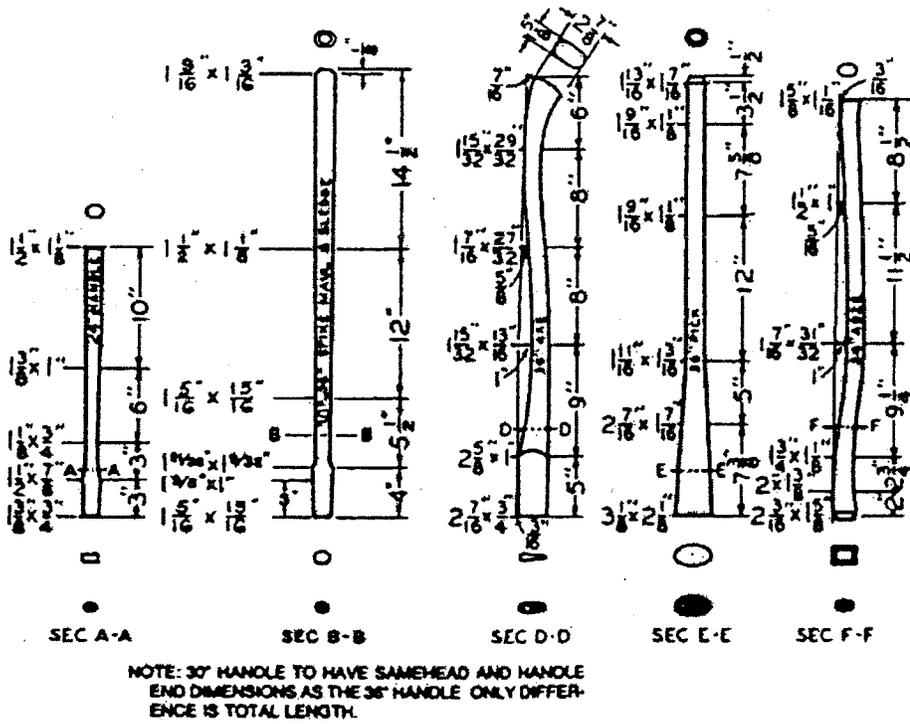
Plan 25-83 – AREMA Track Tool Handles
